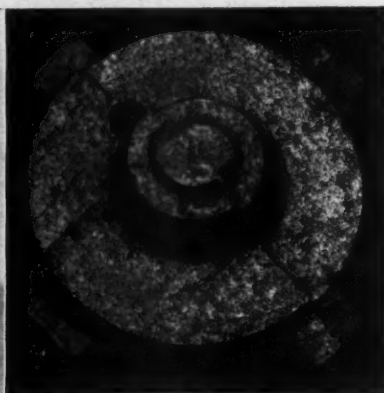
(above)—Aluminum casting showing poor surface finish and shift in boss. Photograph shows casting at  $\frac{1}{2}$  of actual size.
